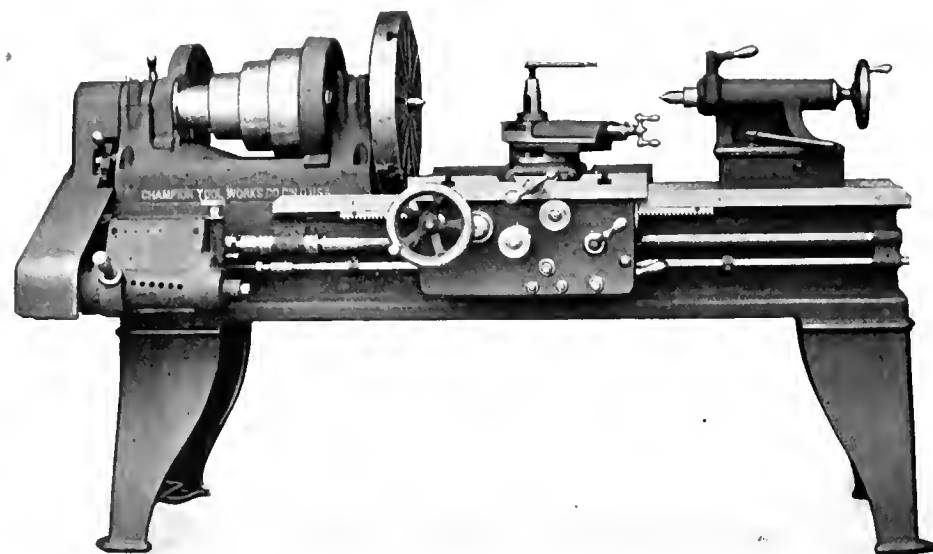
Sixteen-inch Champion Lathe with Gear Box Mechanism giving Forty Changes
